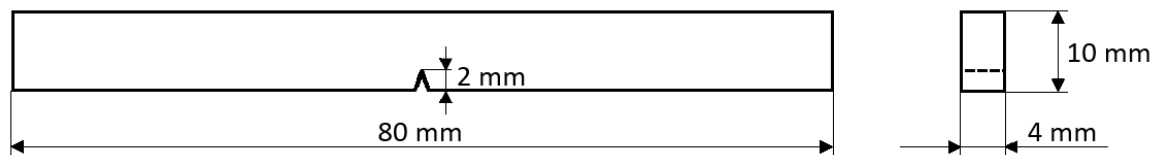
Charpy test specimen dimensions according to DIN EN ISO 179-1.
